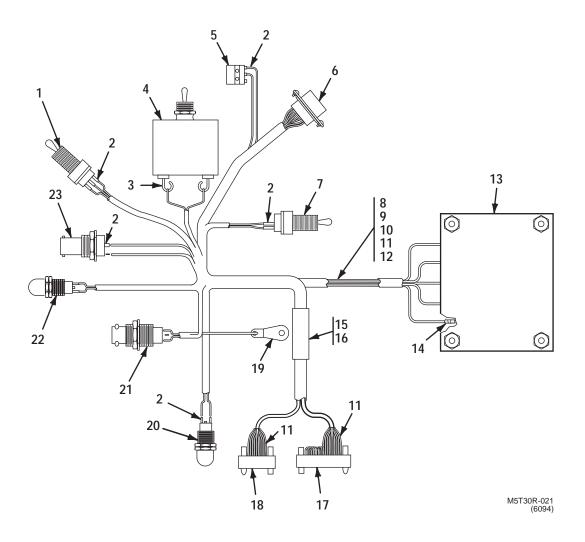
Group 04C010102 and 07C010102 Cable Assembly (W2) 12951560
